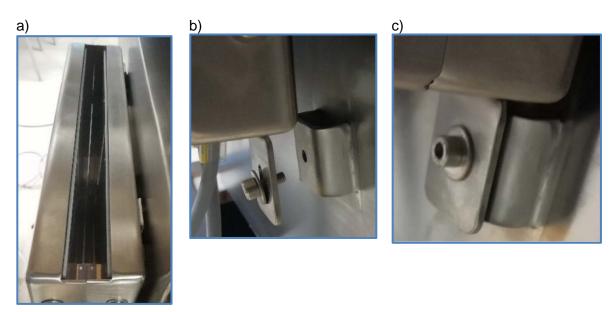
Placing the bag pre-heater – a) Hooking the upper part of the bag pre-heater, b & c) Bolting the bottom part of the bag pre-heater.
